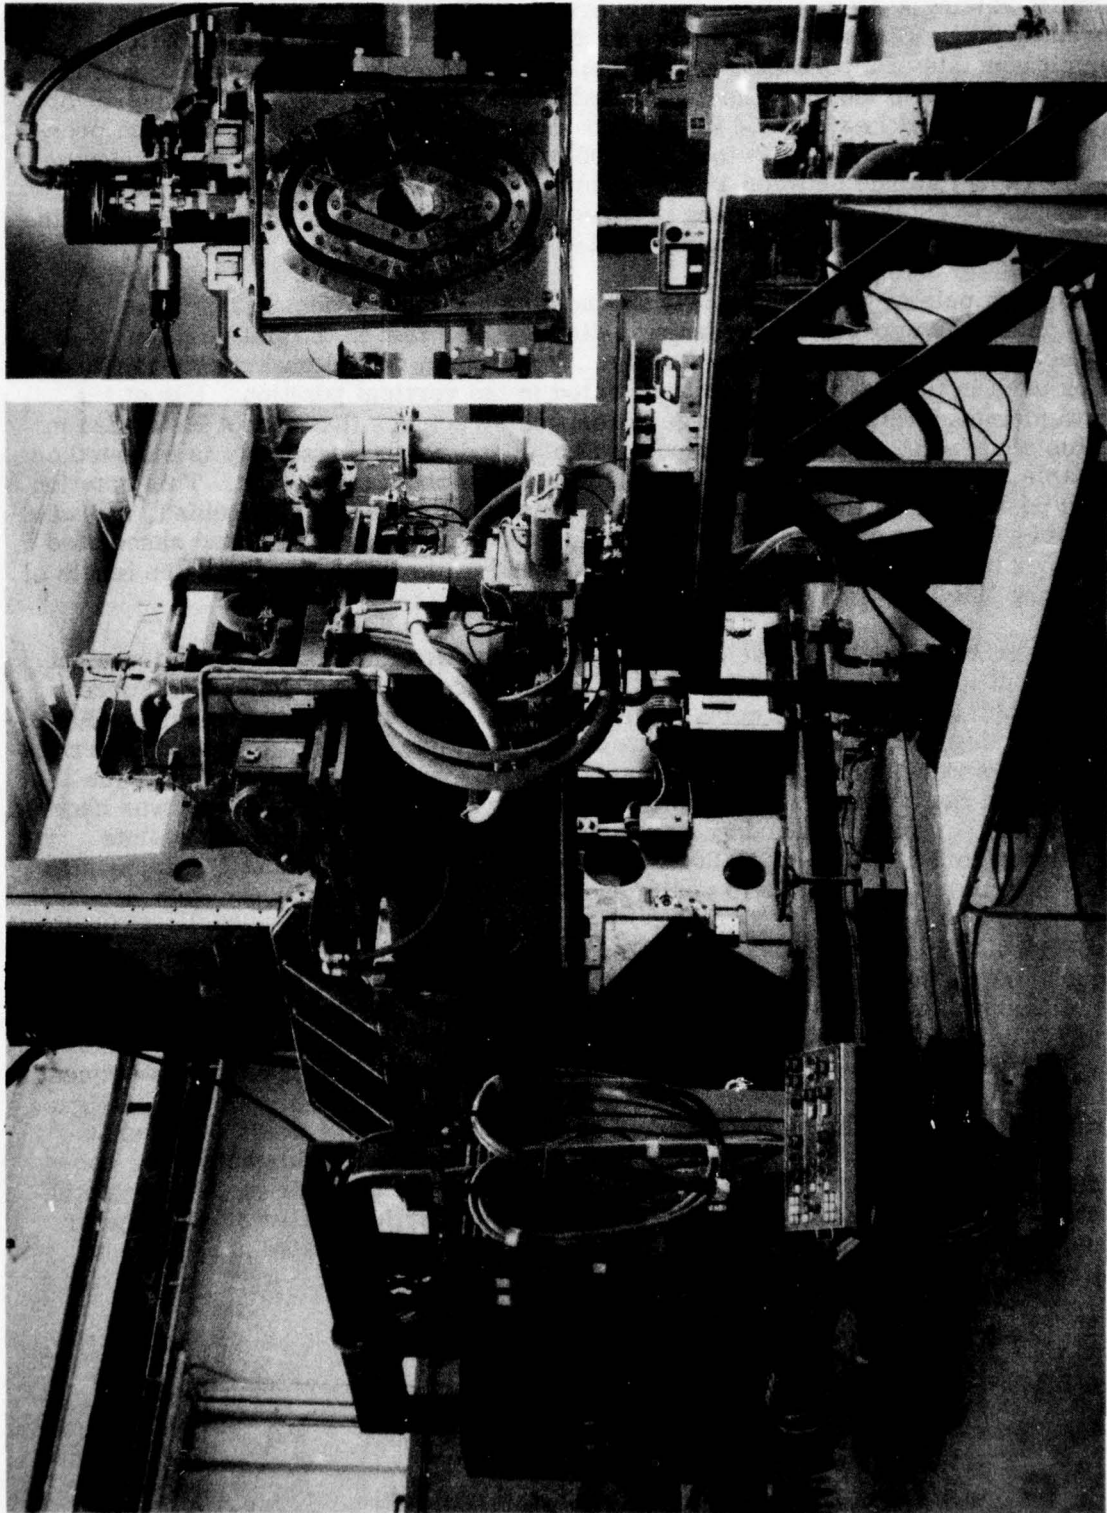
Sliding-Seal Electron-Beam Welder
